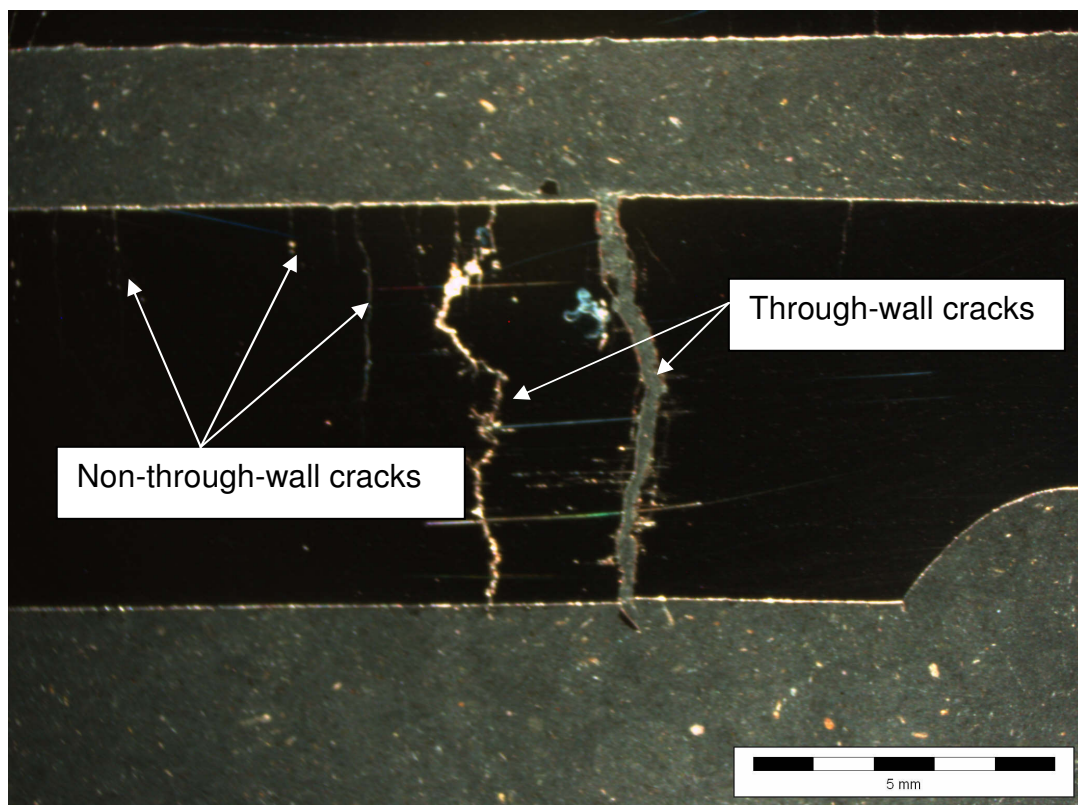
Typical stereo microscope image of type 304L stainless steel sample (cross-section) after testing
